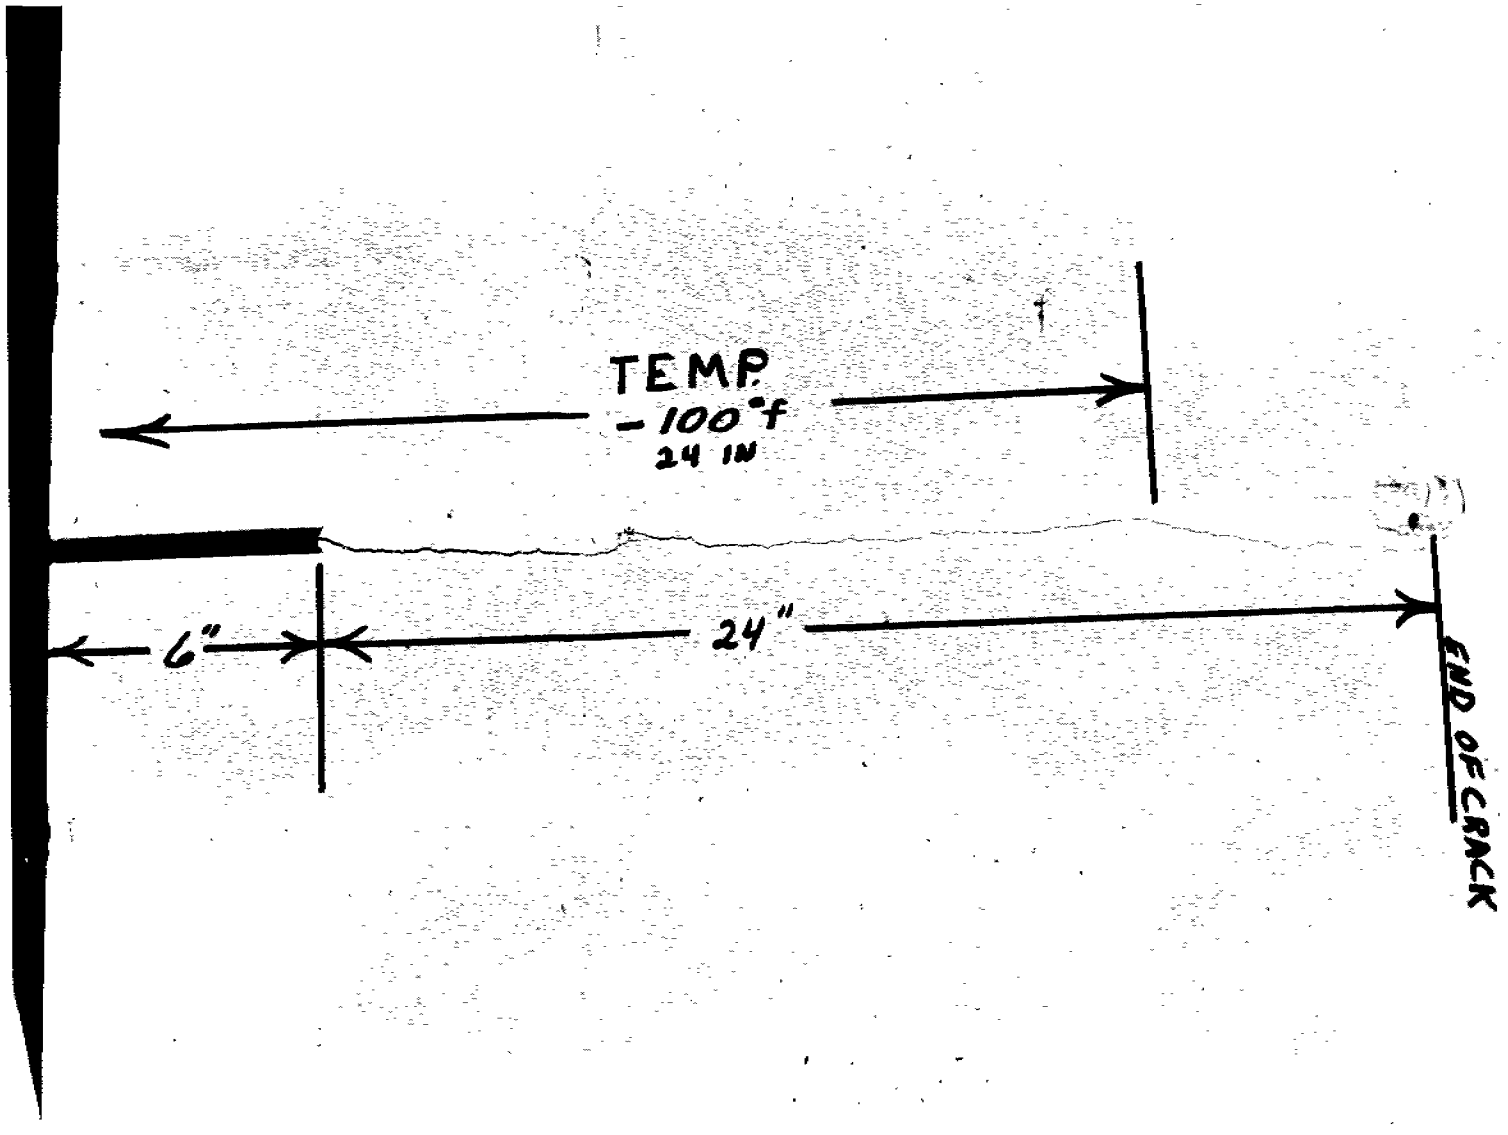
Crack Arrest - Test B18; Specimen Configuration: 5-1/2" Edge Slot Plus 1/2" Fatigue Crack In A 12 x 12" Patch; Cooling Effected Only Around The Fatigue Crack And For A Distance Of 24" Across The Specimen Width; Test Temperature: -100°F ; Fracture Stress: 18,800 Psi On The Gross Section; 19,800 Psi Avg. On The Net.
